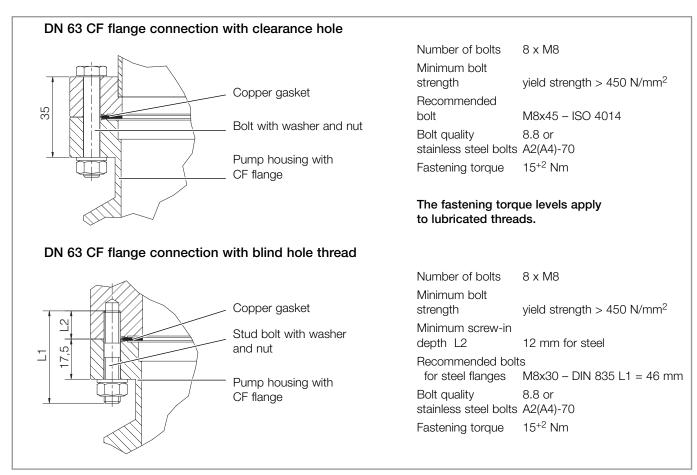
Mounting the DN 63 CF high vacuum flange
